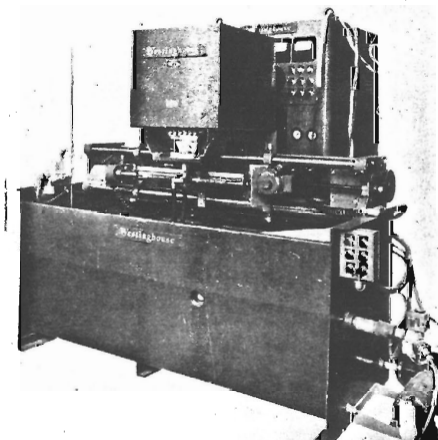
Shaft-hardening work-handling unit. (*Westinghouse Electric Corp.*)
